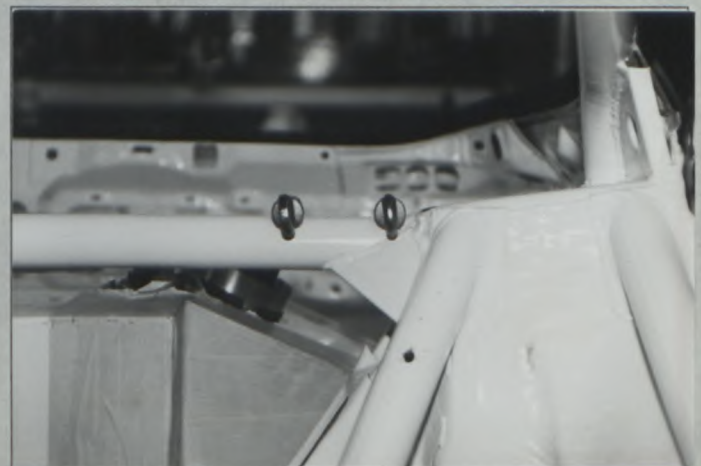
(SEATBELTS ANCHORAGE POINTS)
